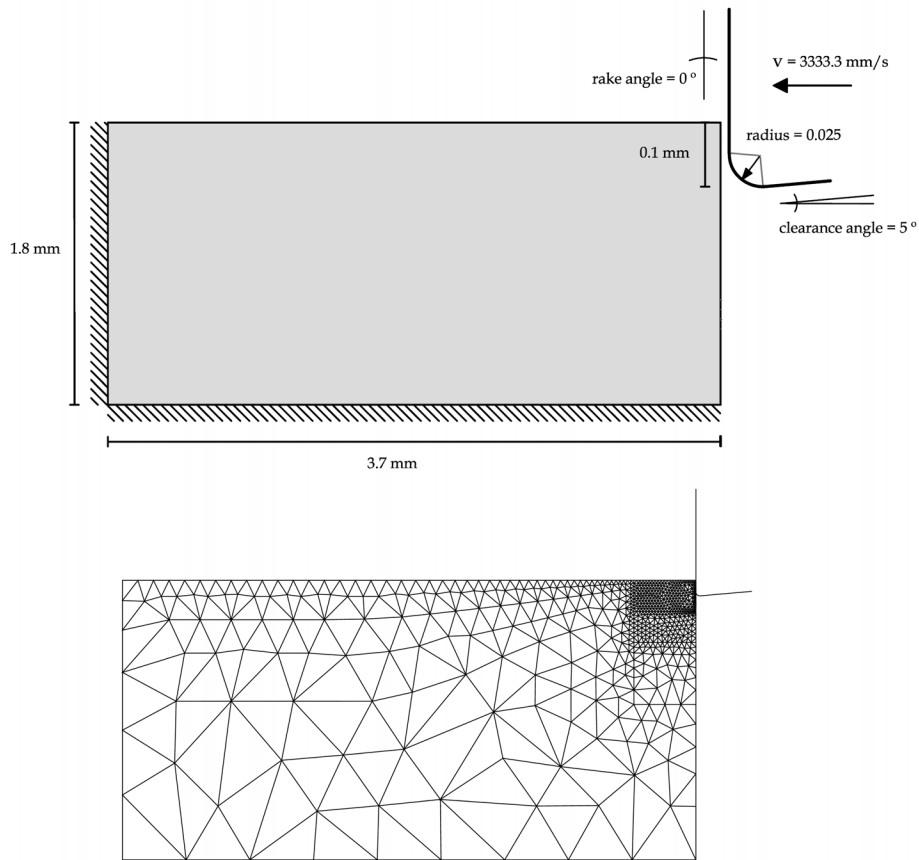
Steel cutting test. Workpiece, tool dimensions and initial unstructured triangular mesh.
